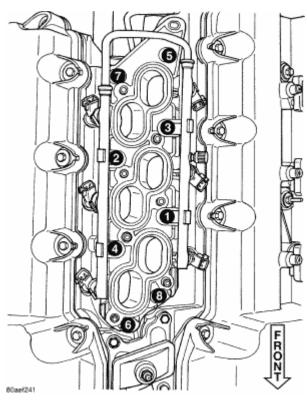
Lower Intake Manifold Tightening Sequence Courtesy of CHRYSLER LLC
